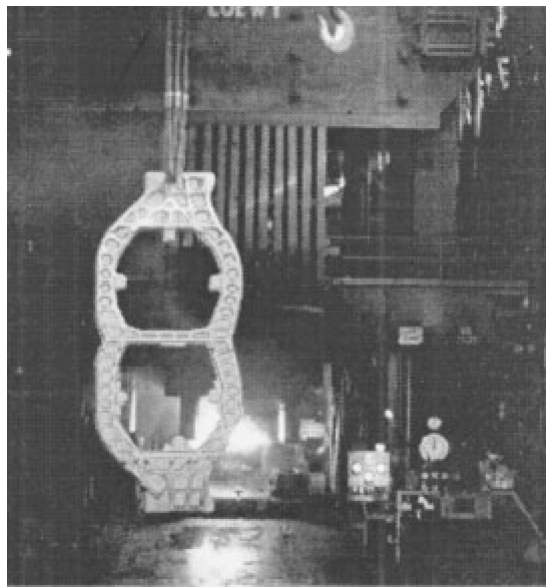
F-22 aft-fuselage frame forging produced on Wyman–Gordon 50,000-ton hydraulic press.
